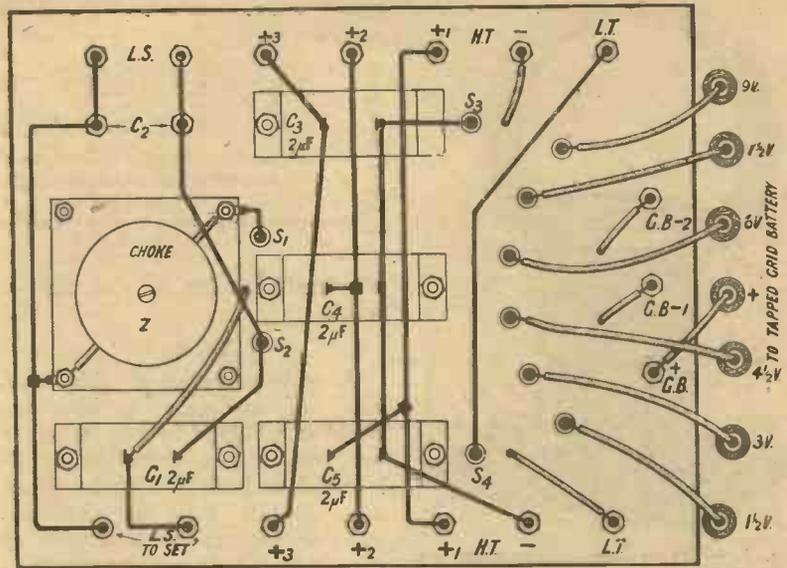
The wiring of the unit is best carried out with stiff wire.
